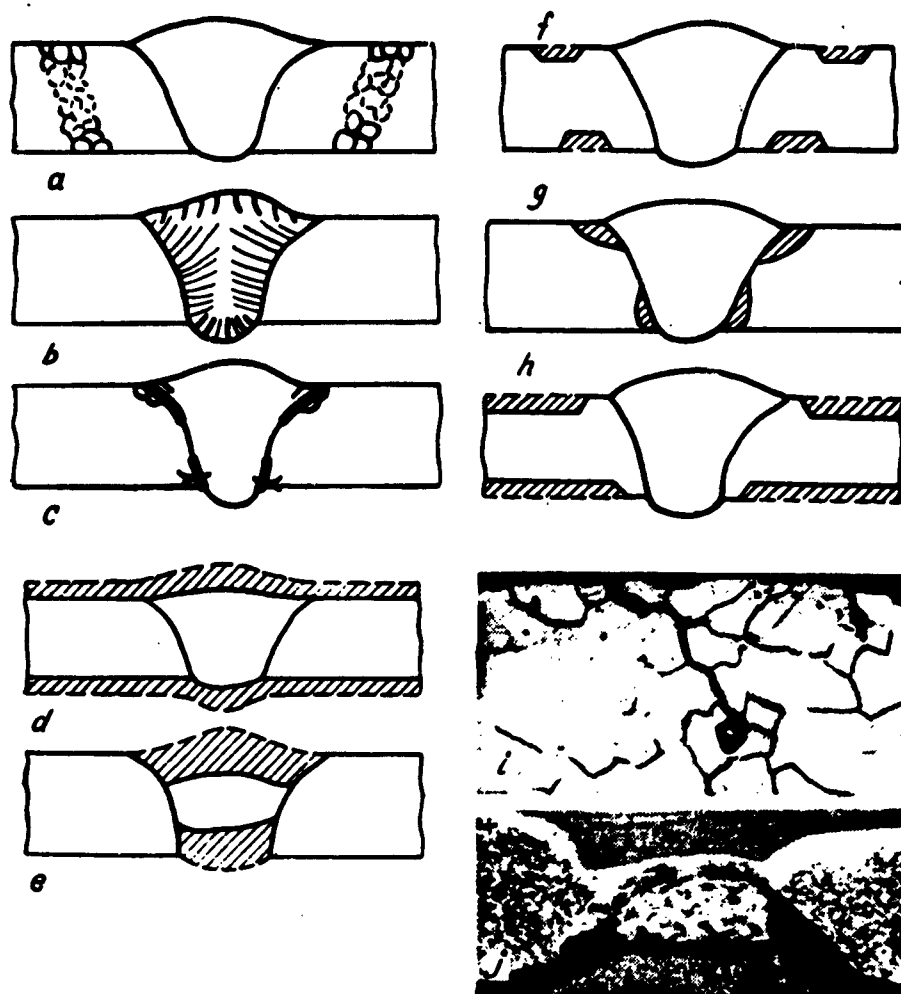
Types of weld joint corrosion deterioration:
